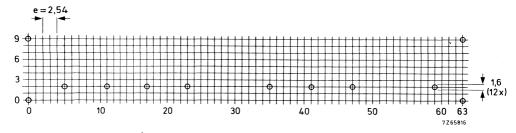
Hole pattern of the printed-wiring board (viewed on solder side).
